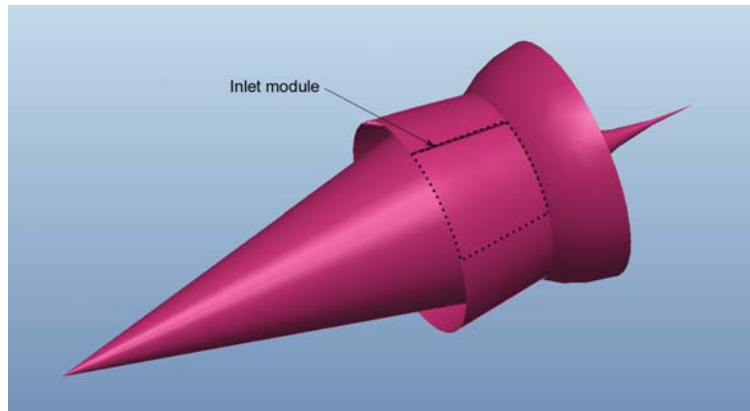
CAD representation of inlet geometry with outer surface of cowl removed
